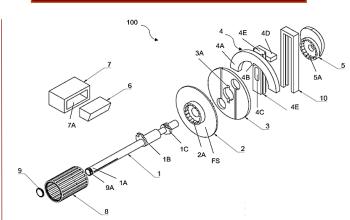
A: Illustrates exploded perspective rear view of a mechanism for locking a seat belt in a vehicle;
